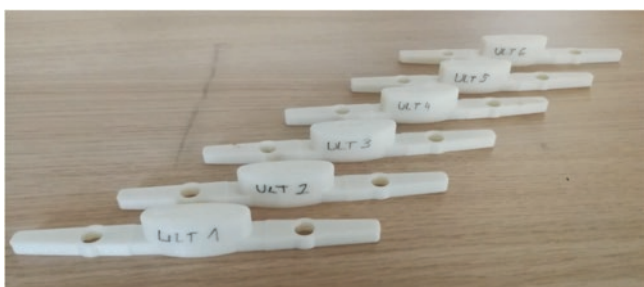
reconstructed 3D printed parts in Z-ULTRAT [1]
